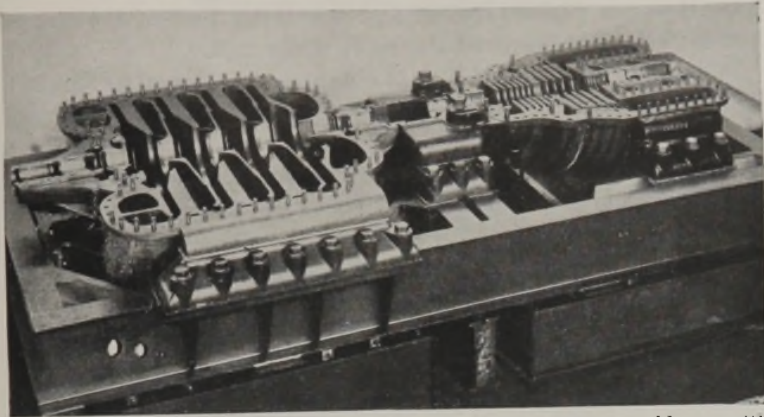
75,000 cfm, 30 lb pressure, turbine-driven blast furnace blower with covers and rotors removed.
